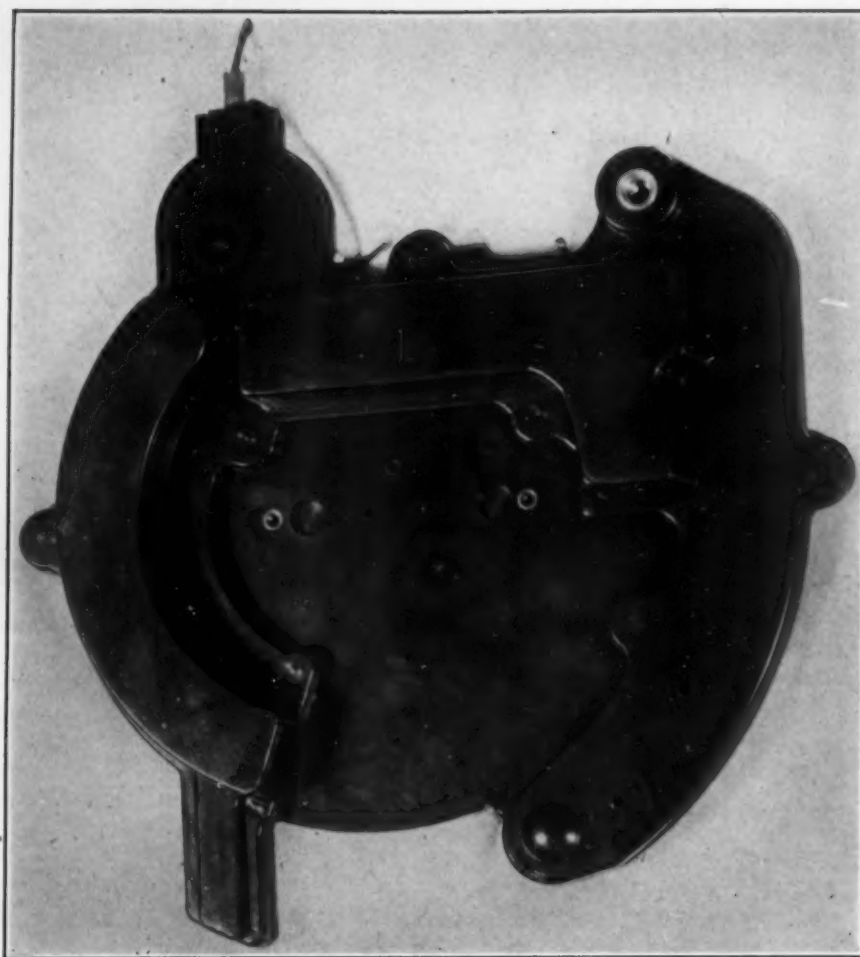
View of assembled gasoline gauge molded of shellac composition.
